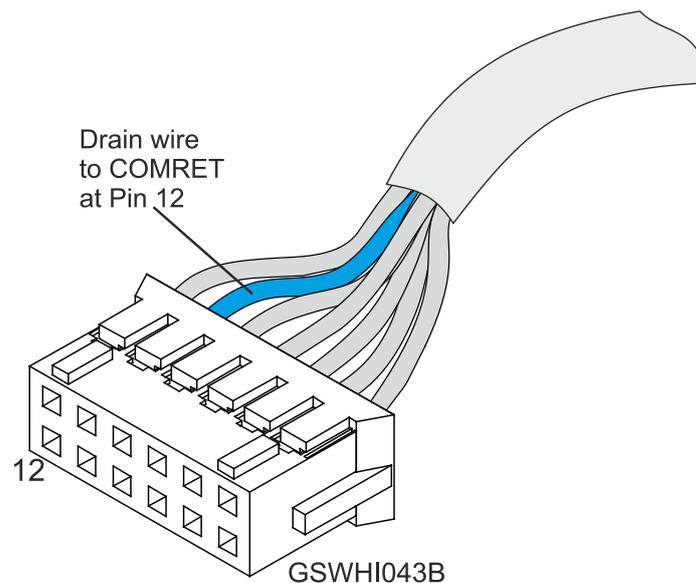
Feedback and Shrouded Control Cable Assemblies – Example
